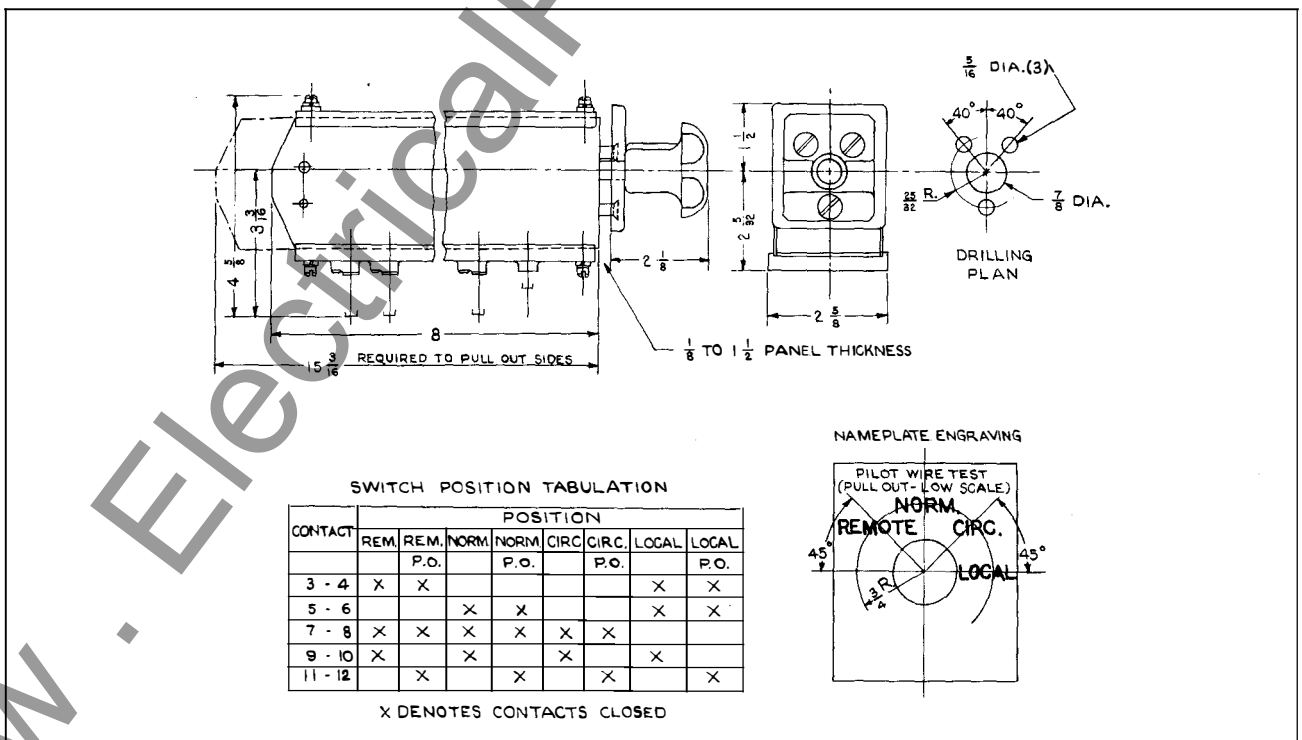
Outline and Drilling Plan of the Type W Test Switch. For Reference Only.
